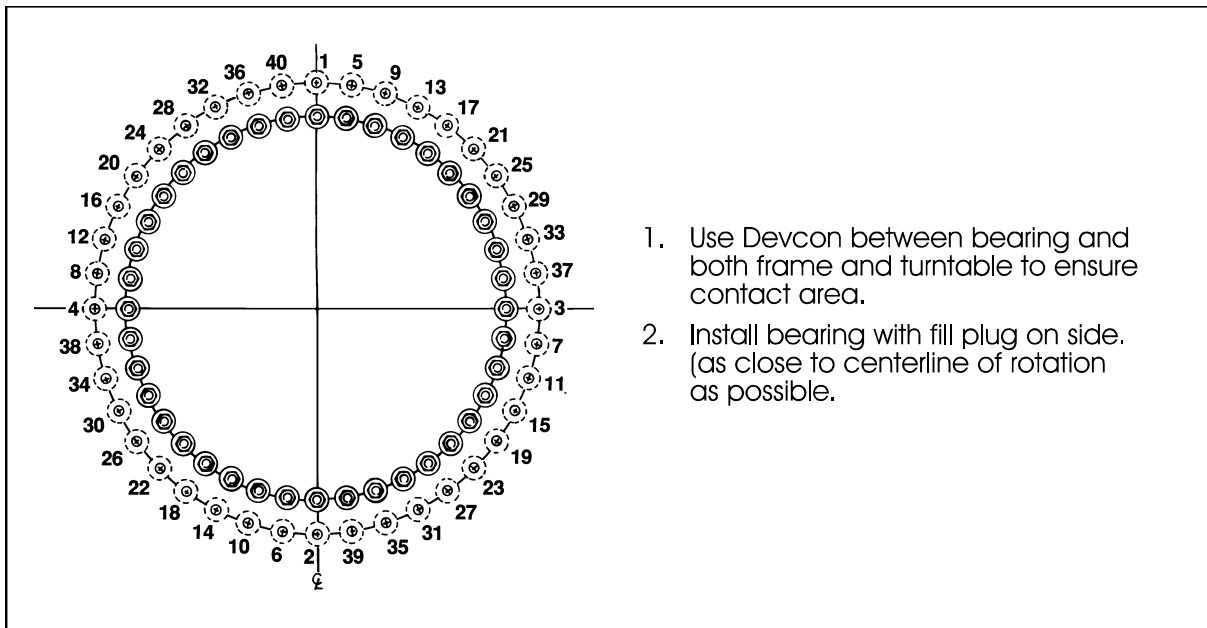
Swing Bearing Bolt Torquing Sequence
